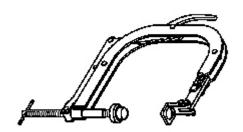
Valve Spring Compressor C-3422-D Courtesy of CHRYSLER LLC
